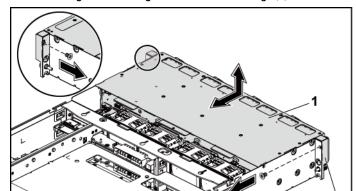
Removing and Installing the 3.5" Hard-Drive Cage (2)
